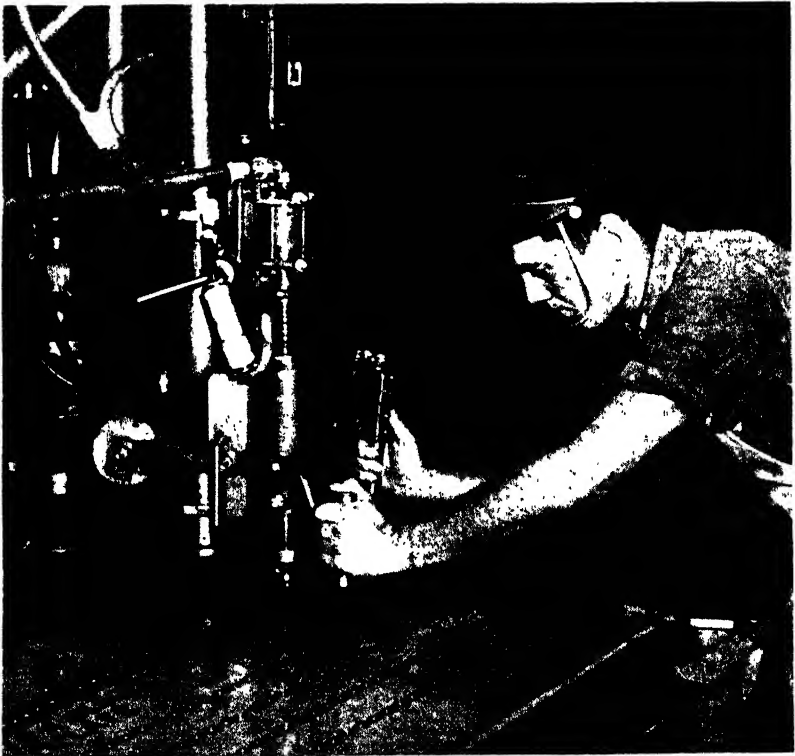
Locating and Rivet Holes are Accurately Drilled through Stacks of Sheets by Using Templates and a "Finder"
